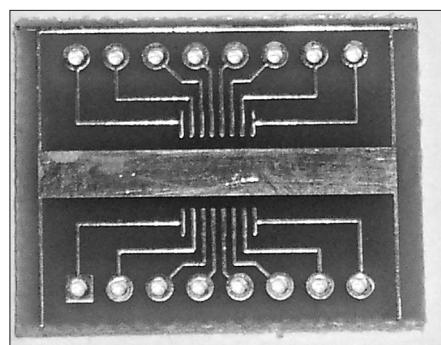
F — Surface mount ICs can be mounted to general-purpose carrier boards, then attached as a submodule with wires to the base board of the homebrew project.
